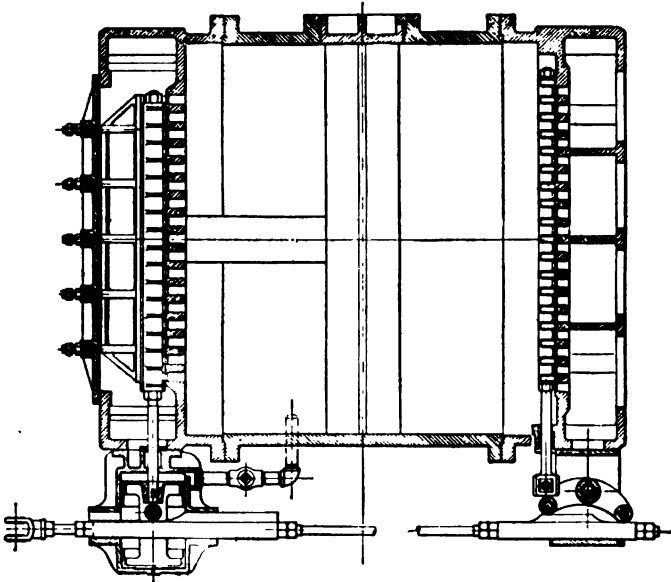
Southwark air cylinder showing inlet and outlet valves, with gear.
